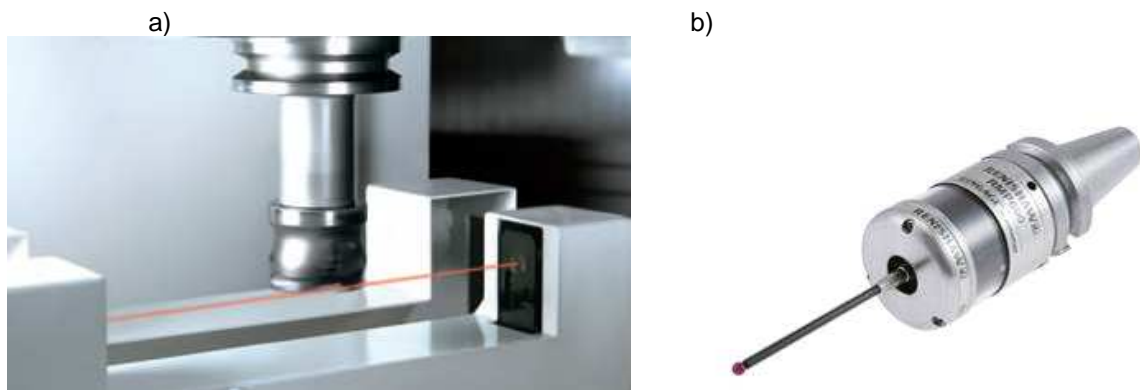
Measurement probes a) probe for tool setting, b) RMP600 high accuracy touch probe
